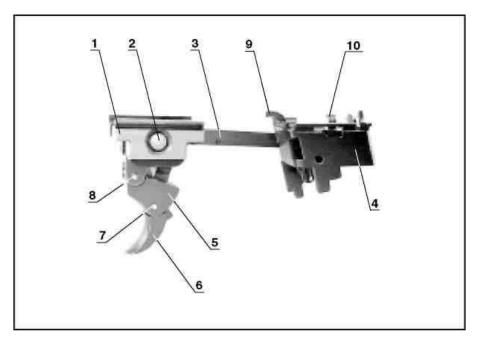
Trigger mechanism: – steering insert; 2 – main pin; 3 – trigger bar; 4 – rear insert; 5 – trigger housing; 6 – trigger; 7 – trigger bar pin; 8 – trigger pin; 9 – ejector and 10 – fire interrupter (integral parts of the rear insert)
